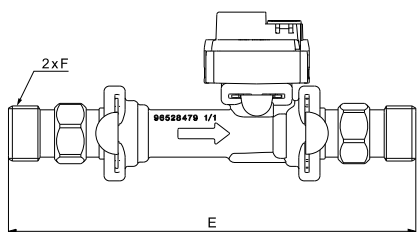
Dimensions, MFS 2-20 l/min, with adapters
